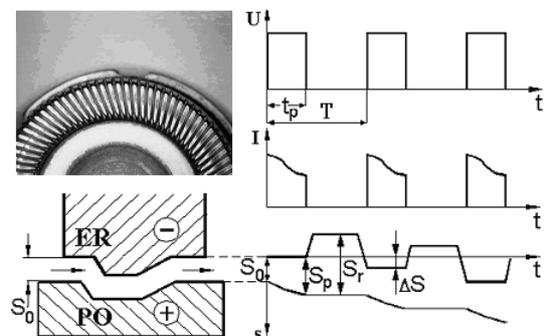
Principal scheme of the PECM and example of machined part (a detail of a shaving head with slots [6])
